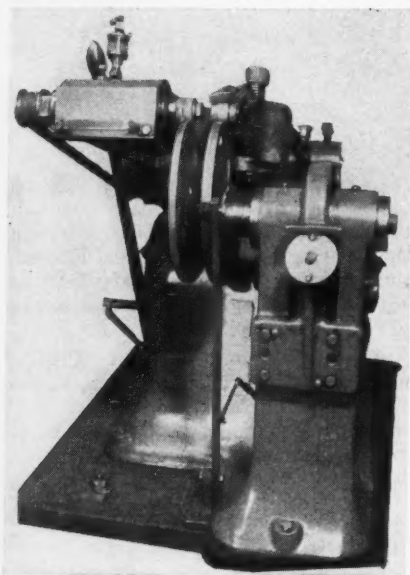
Cams are finished to size by grinding in this special cam grinding machine.
